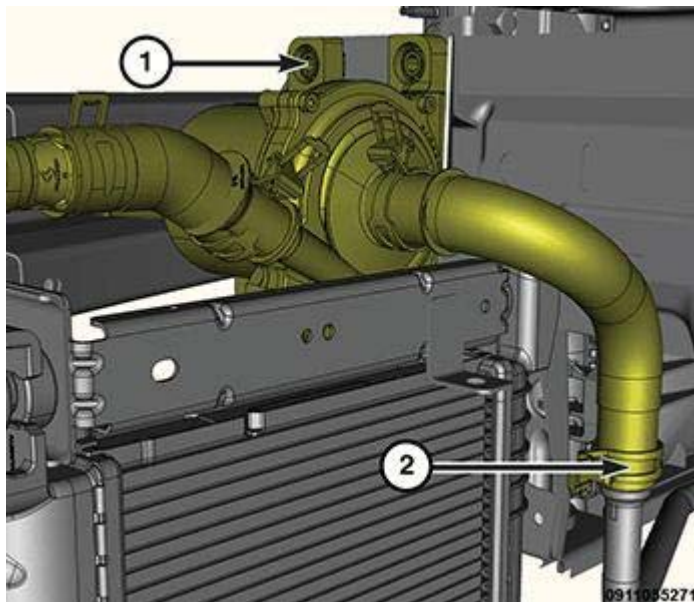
Coolant Pump To Mounting Bracket Nuts & Clamp
